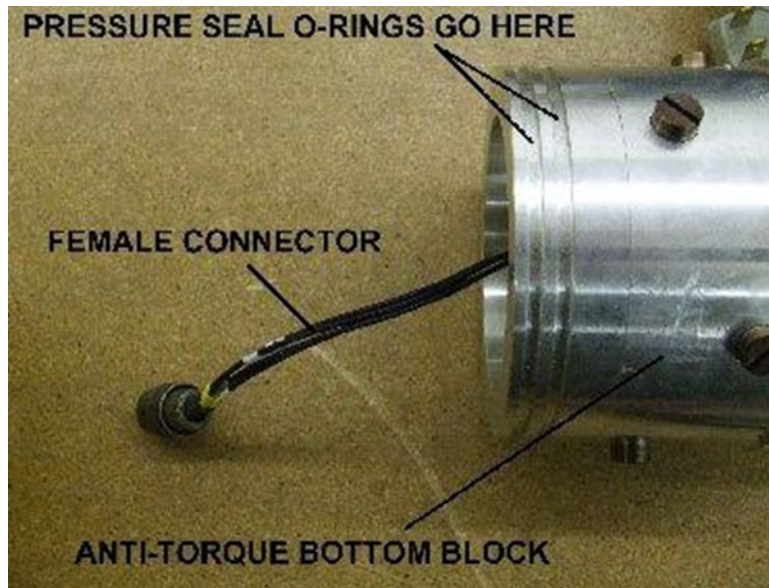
Anti-Torque to Drill Motor Jumper Cable
